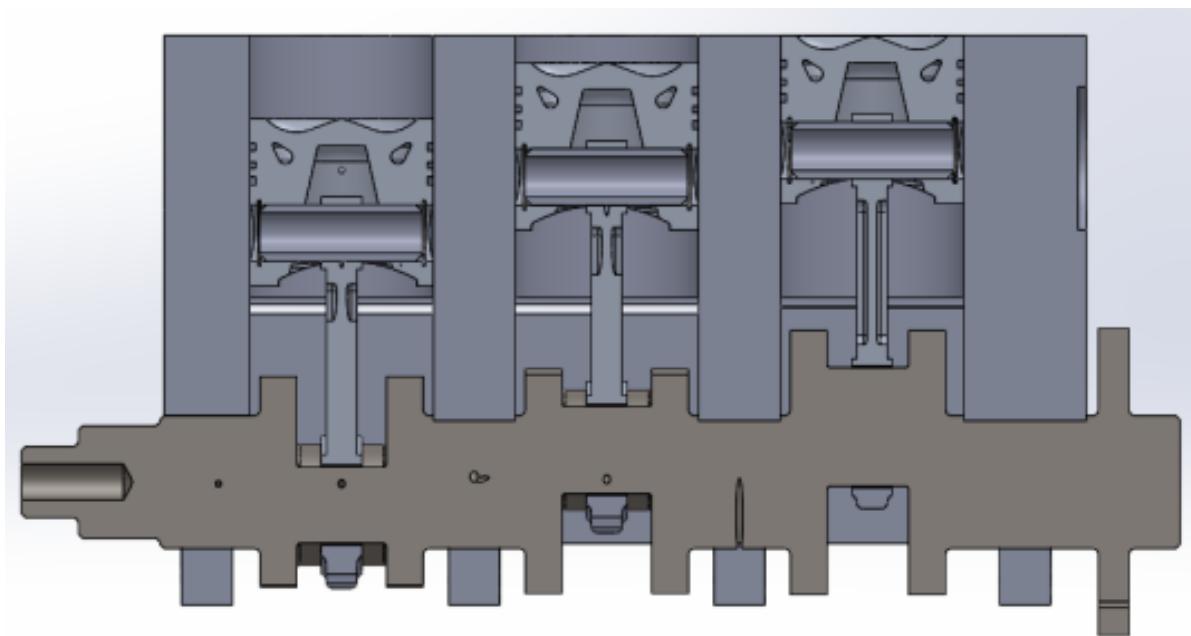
Section view of assemble of crank mechanism and cylinder block.
